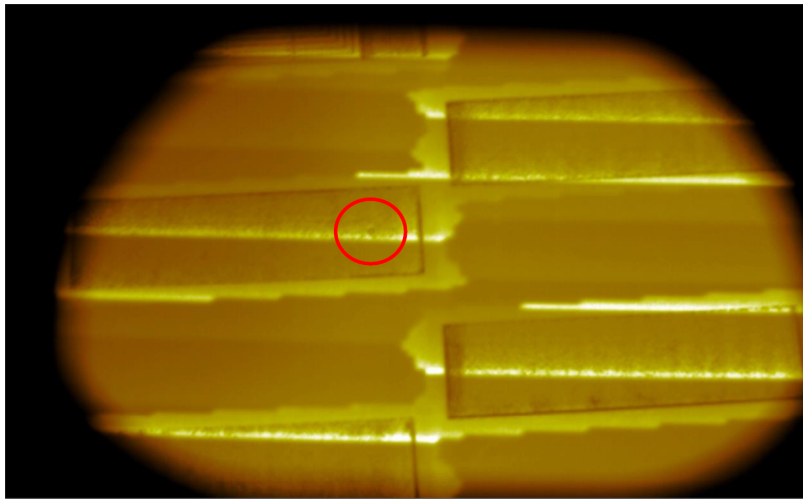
Infrared camera view of build plate during manufacturing of P1 specimens. Multiple passes of the electron beam are shown and are identified by bright horizontal lines. The built in angle of the specimens on the build plate are also shown. The red circle identifies the generation of a void [26].
